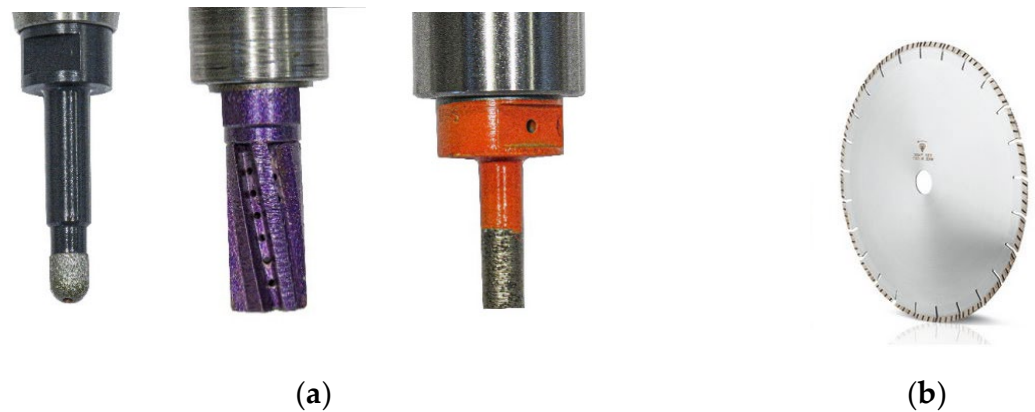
Different tools for subtractive post-processing: (a) milling tools and (b) saw blade.
